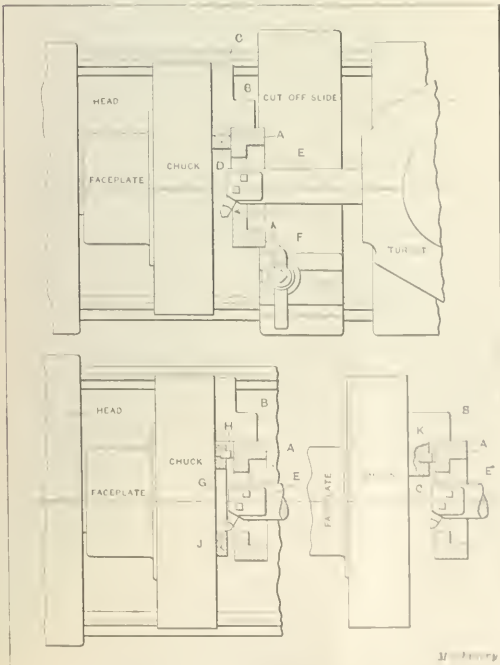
Three Methods of holding Forged Steel Clutch Ring to be machined on Horizontal Turret Lathe
